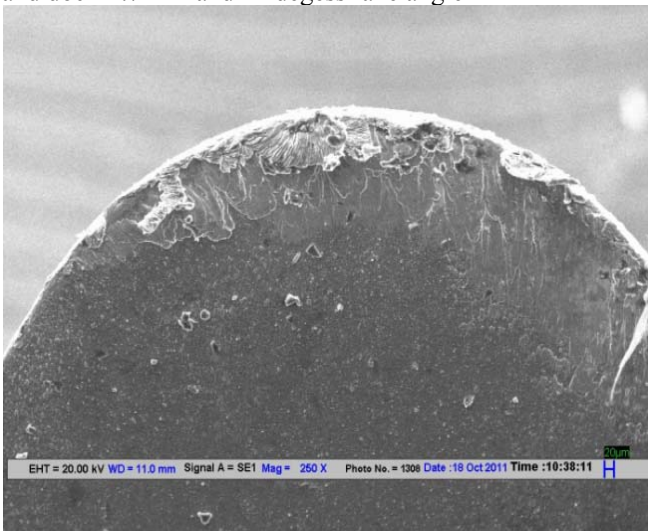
SEM micrograph of cutting tool insert under the following cutting conditions: V=100 m/min; f = 0.12 mm/rev and doc =1.1 mm and 14 degess rake angle
